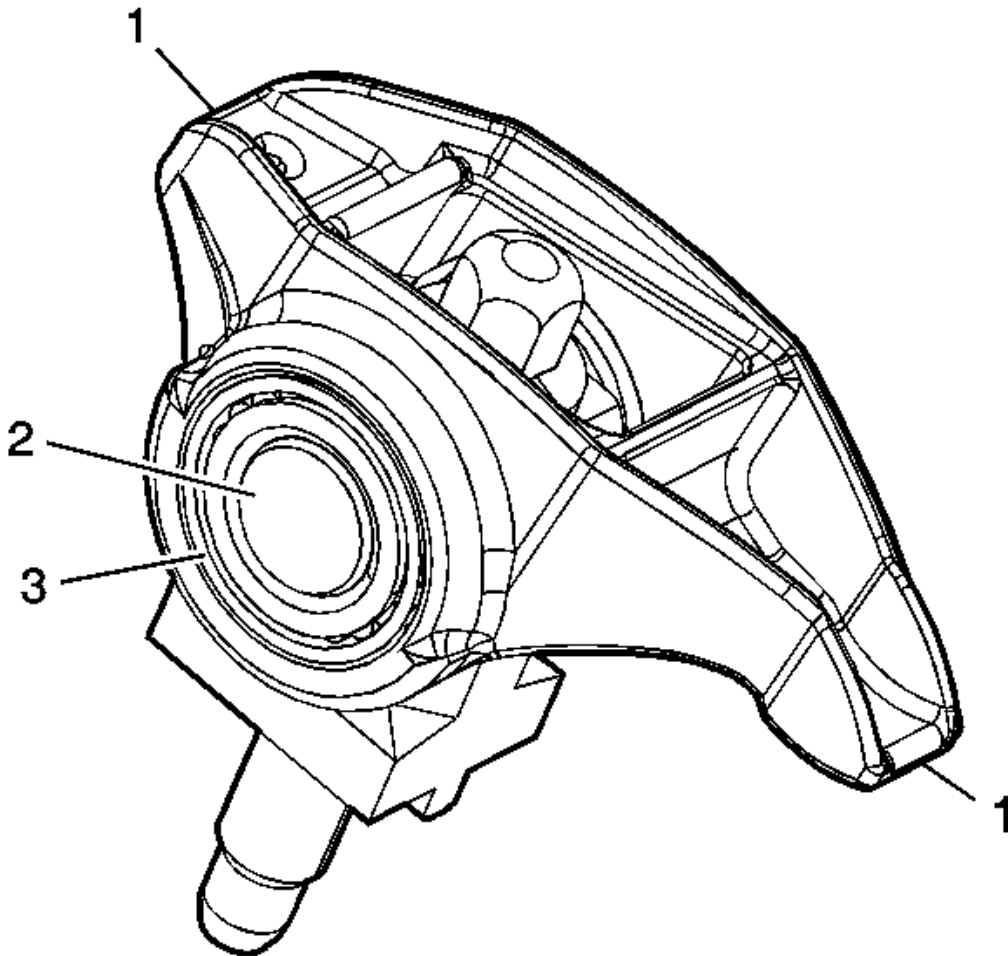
Identifying Valve Rocker Arm Inspection Areas
